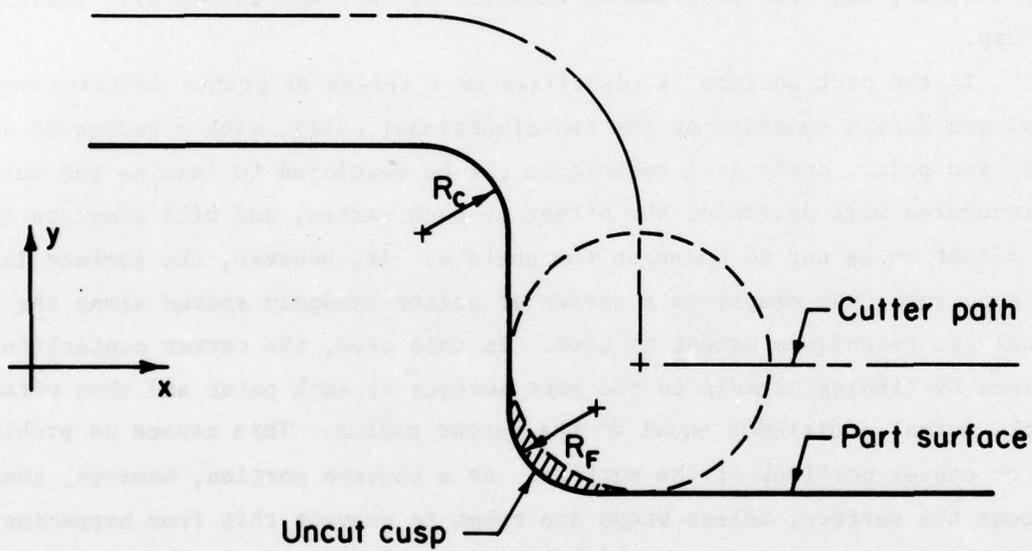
CUTTER PATH GEOMETRY AT A CORNER AND A FILLET IN TWO-DIMENSIONAL NC MACHINING
